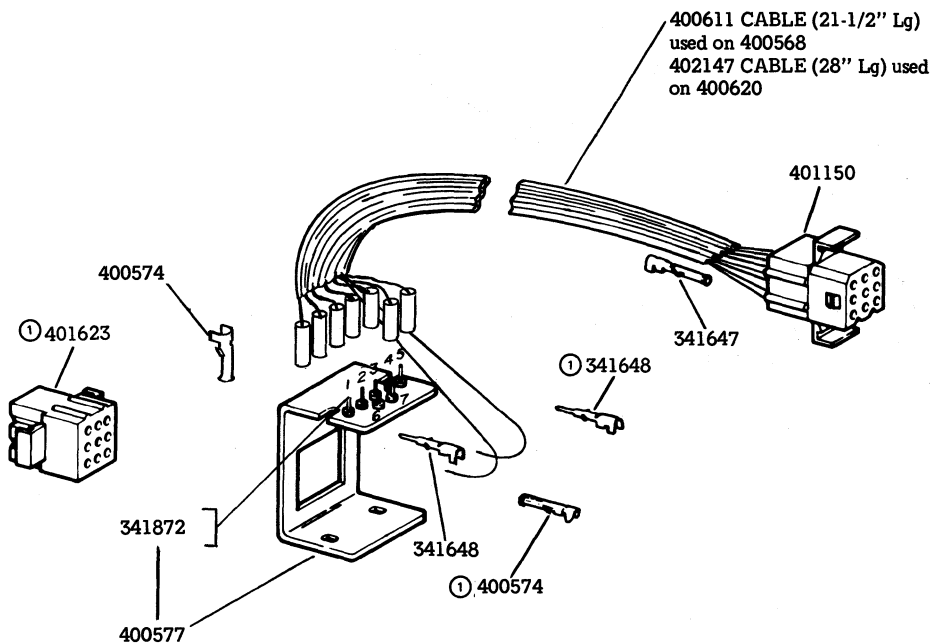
400621 SSI Cable Assembly for Friction Feed Printer Under Monitor Cabinet
